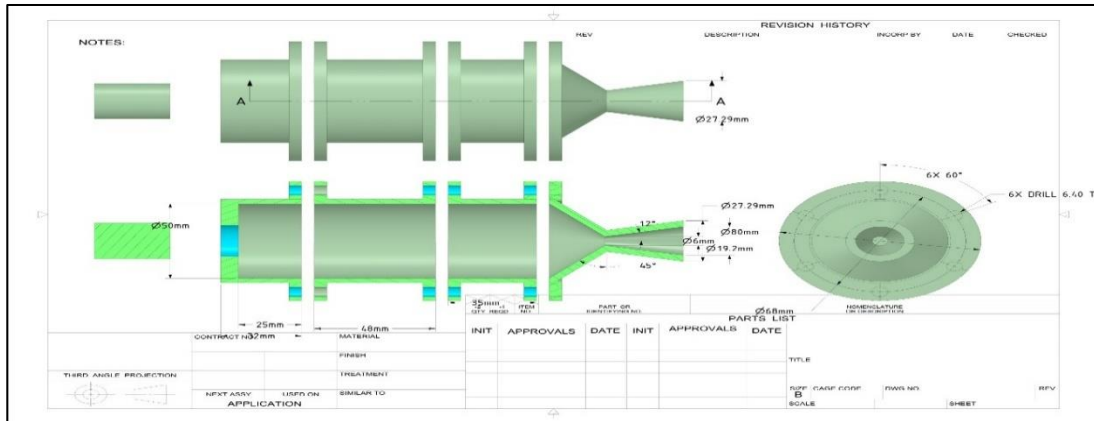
Complete assembly blueprint of the hybrid rocket motor
